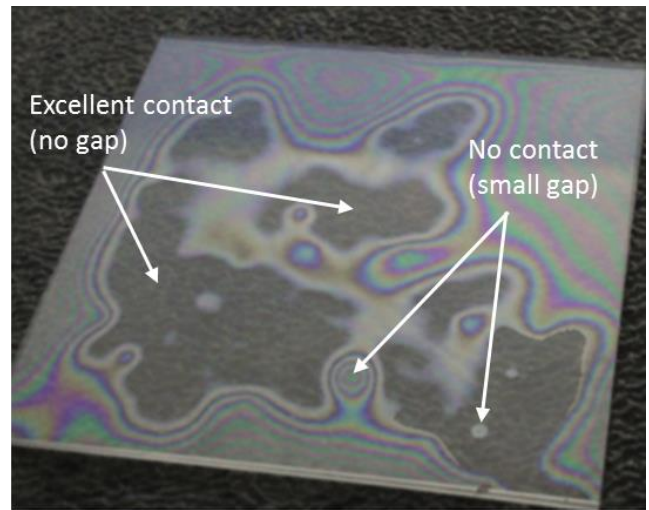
Inappropriate preparation of glass samples for welding.
